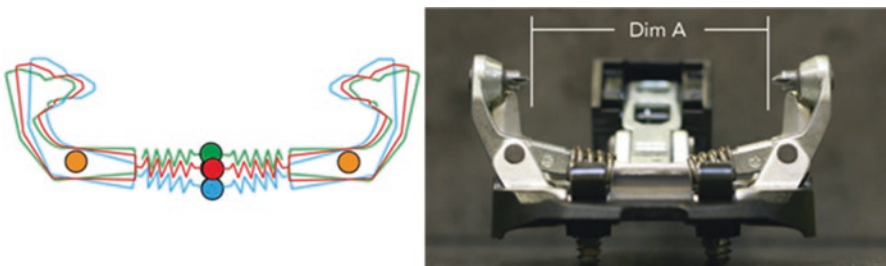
(Left) Open and closed equilibrium positions of the Tech/Pin binding toe piece. (Right) Dim A is denoted as the pin-to-pin dimension when the binding is closed
